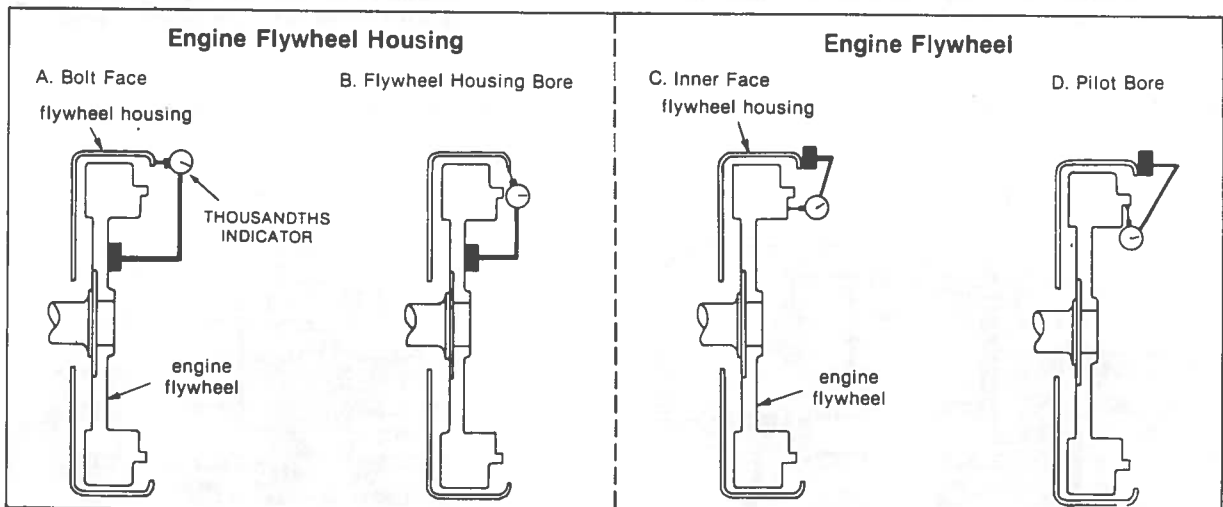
Dial Indicating Engine Flywheel Housing and Engine Flywheel.
